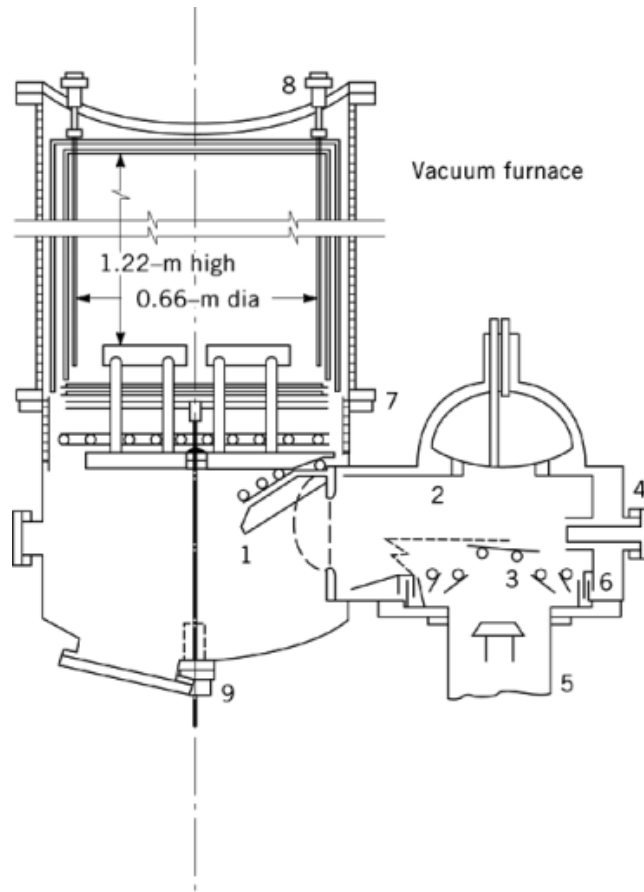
A low contamination vacuum brazing furnace for brazing large metal-to-ceramic joints: 1, valve, open (—) and shut (---); 2, LN trap; 3, water-cooled baffle; 4, valve actuator feedthroughs for lowering the bottom heat shields; 5, diffusion pump oil, 1.25-cm dia; 6, creep barrier; 7, flange separation for opening the furnace; 8, electrical feedthroughs for lowering the bottom heat shields; 9, seal for raising and lowering of the furnace (42).
